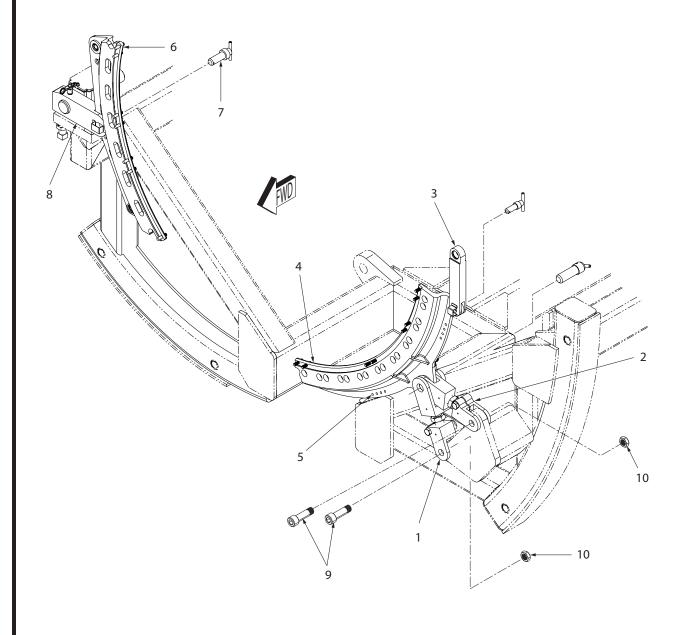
AGSE-E21518-S01 FWD Engine Support Assembly
